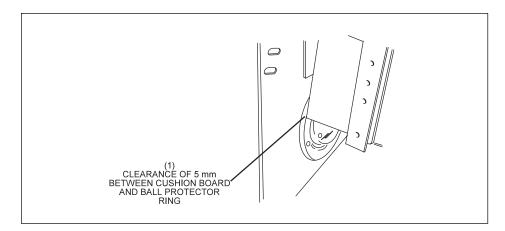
5 mm Clearance Between Cushion Board and Ball Protector Ring.
